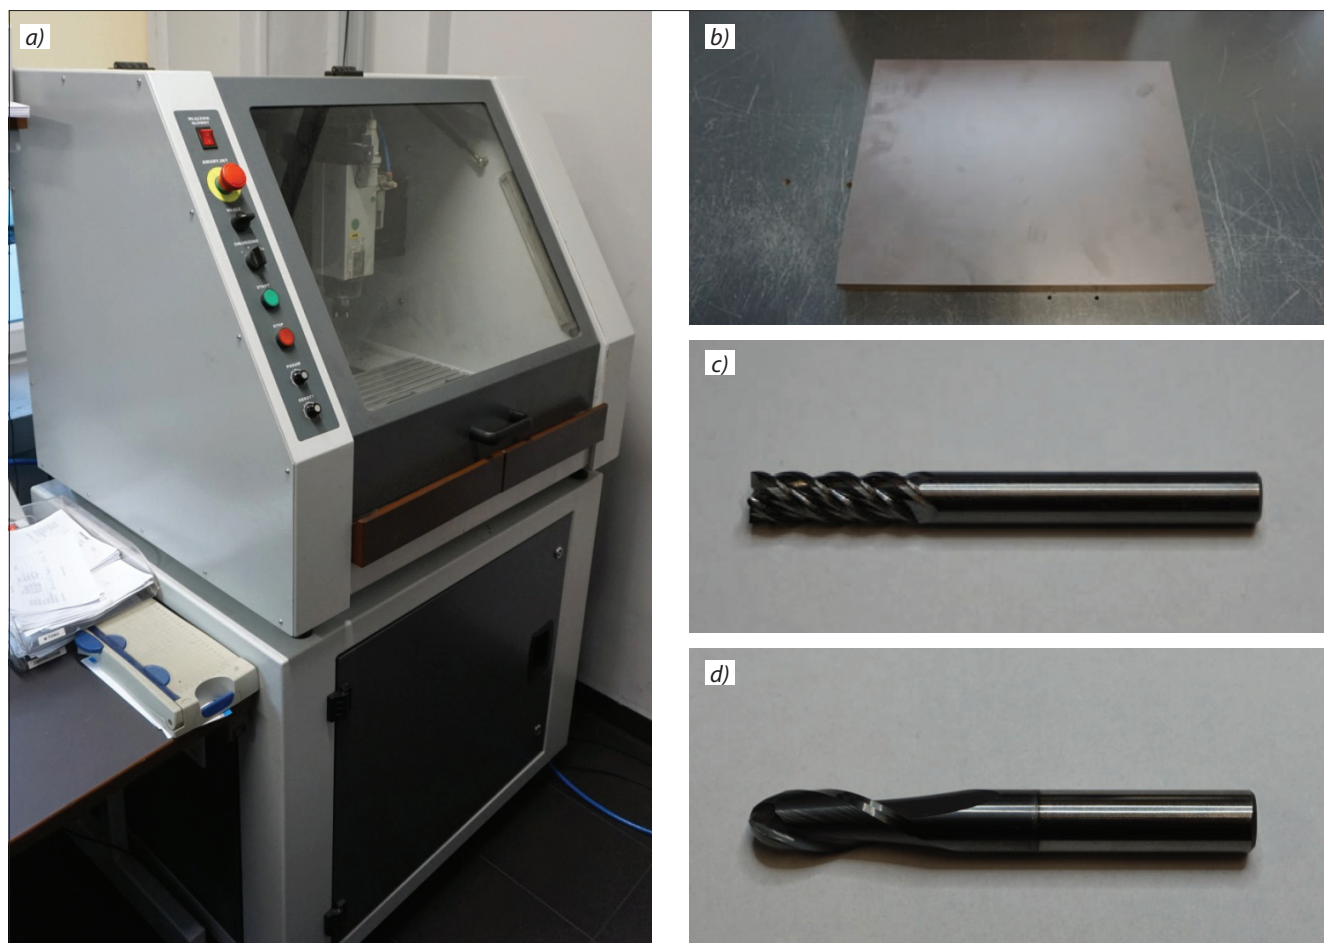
Implementation of the machining process: a) Kimla BlackBOX 4037 engraving machine, b) HPL laminate sheet, c) four-flute end mill, d) end mill with a ball end
